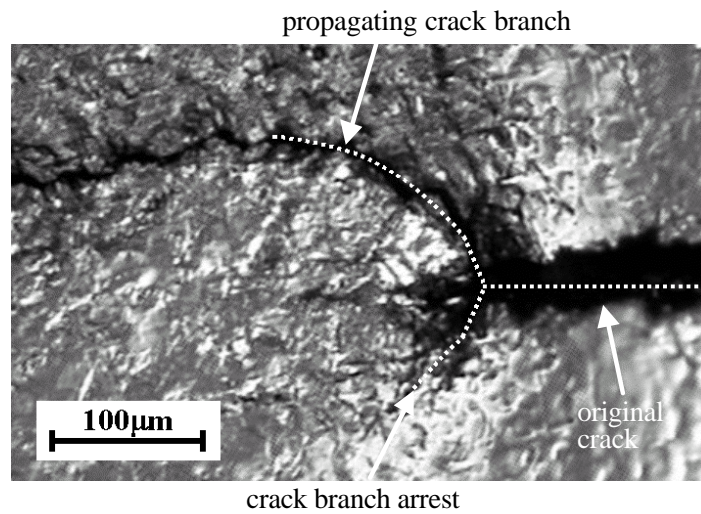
Crack branching on an SAE 1020 C(T) specimen.
